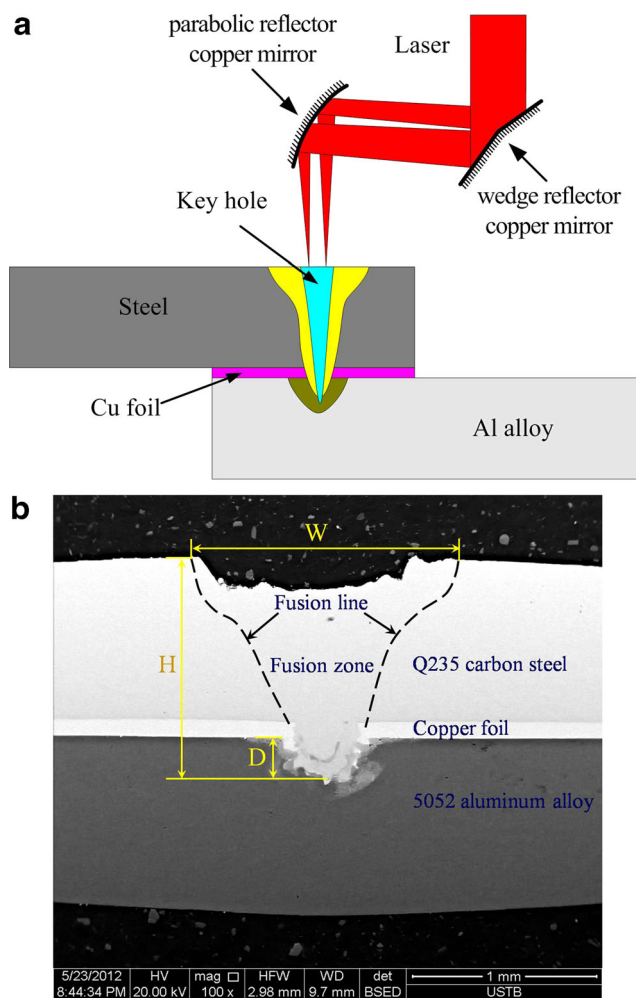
Schematic illustration of a dual-laser beam welding system and b the weld appearance parameters
